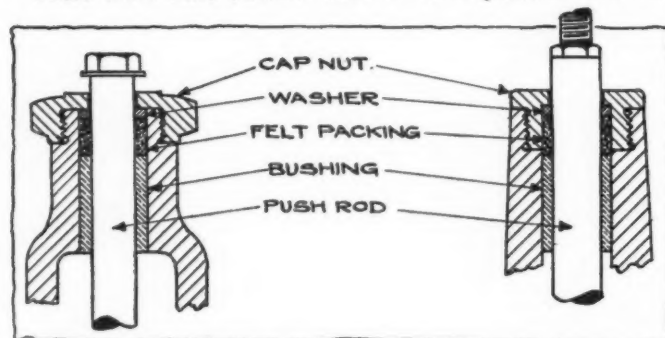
Two types of packing boxes used on push rods, which will stop the oil issuing from crankcase
